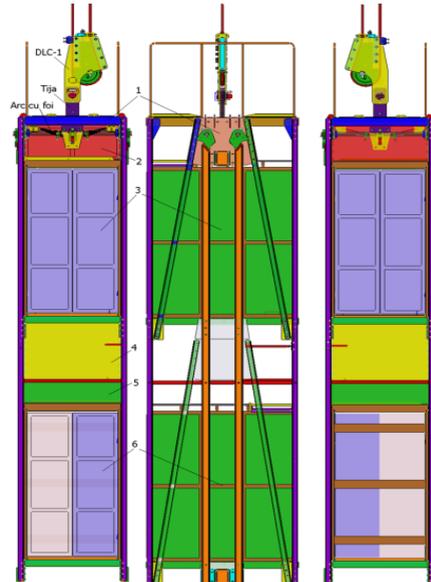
Construction of the two-stage cage. 1 — metal frame; 2 — upper panel; 3 — upper cab; 4 — intermediate panel; 5 — lower panel; 6 — lower cab.
